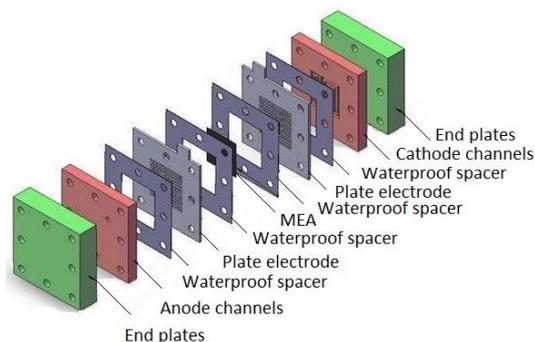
Exploded view of the transparent DMFC test fixture (Yeh et al. [20]).
